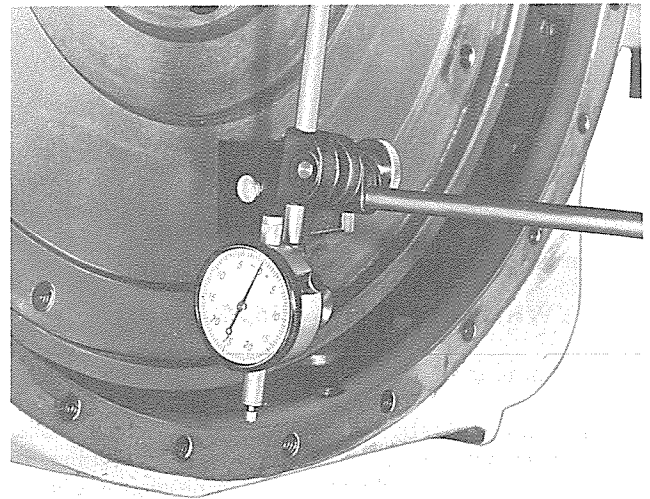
Measuring Run-Out of Flywheel Housing Bore (T-40272)
